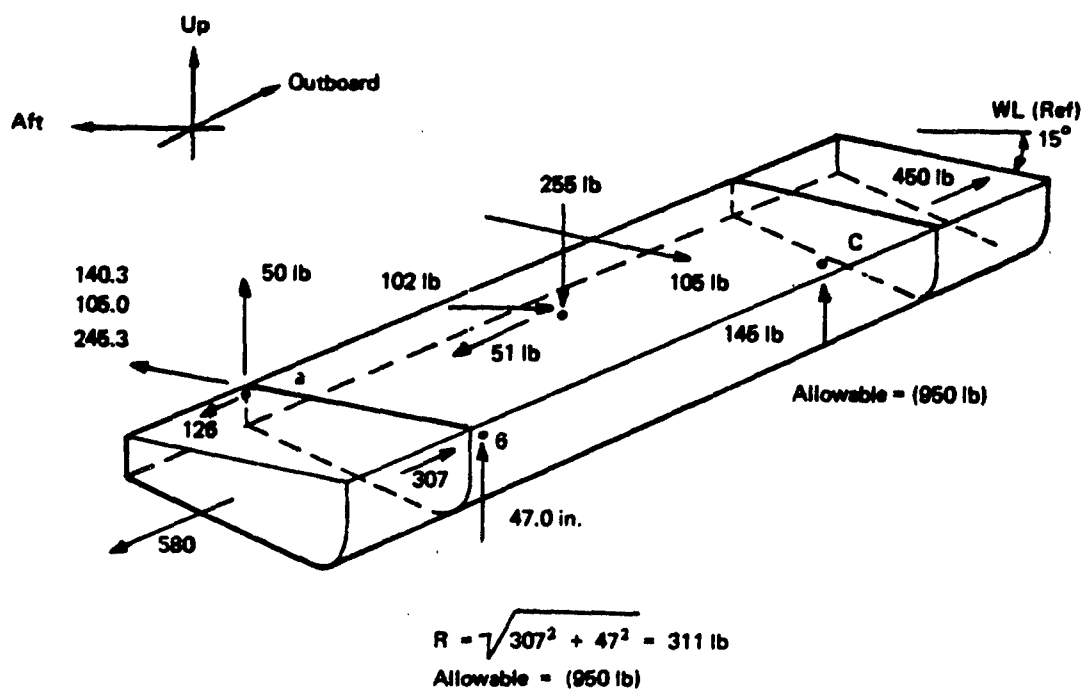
Inboard Wing Duct Attachment Loads - Condition A and B
